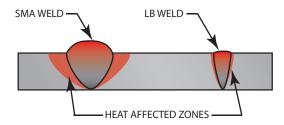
The smaller welds and heat-affected zone of laser beam welds reduce weld distortion.
